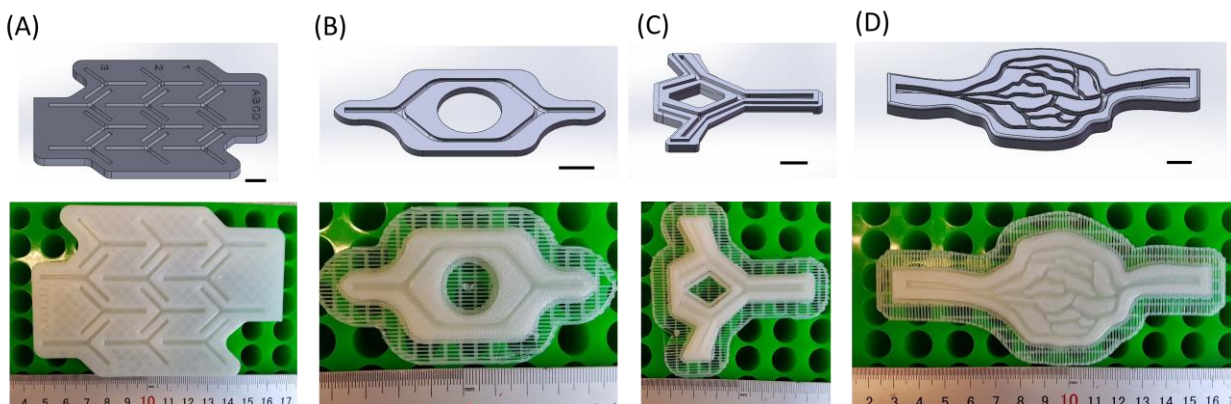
CAD design and corresponding 3D printed custom molds for reversible gel core casting, including (A)-(B) bifurcating, (C) quadrifurcate, and (D) irregular connecting structures. Scale bar: 10 mm.
